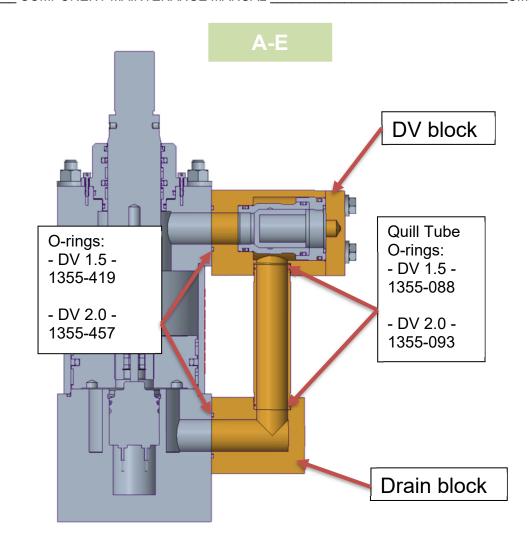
Install Dump Valve onto Cylinder, Fail Extend View
